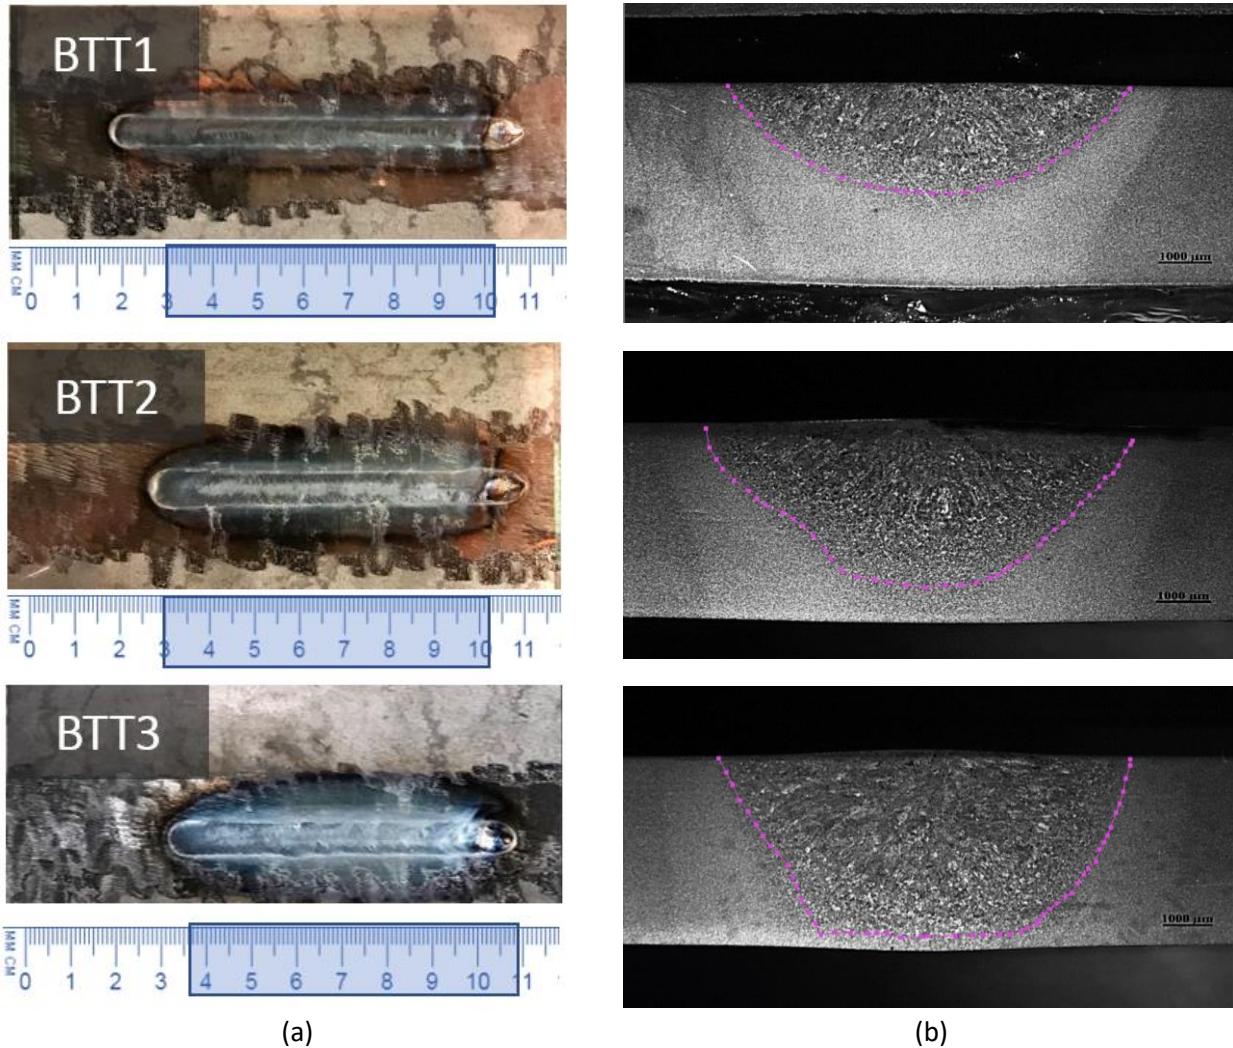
(a) Top view of welded plates, (b) weld cross sections showing changes in weld penetration with heat input and the onset of burn-through.
